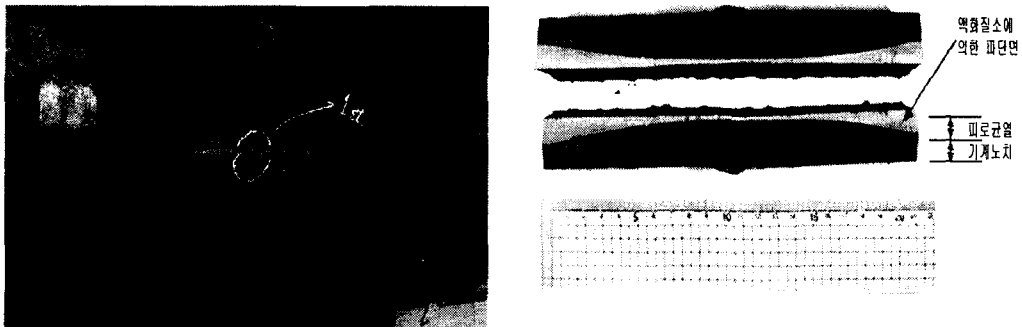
Typical fatigue rupture and fracture surface
